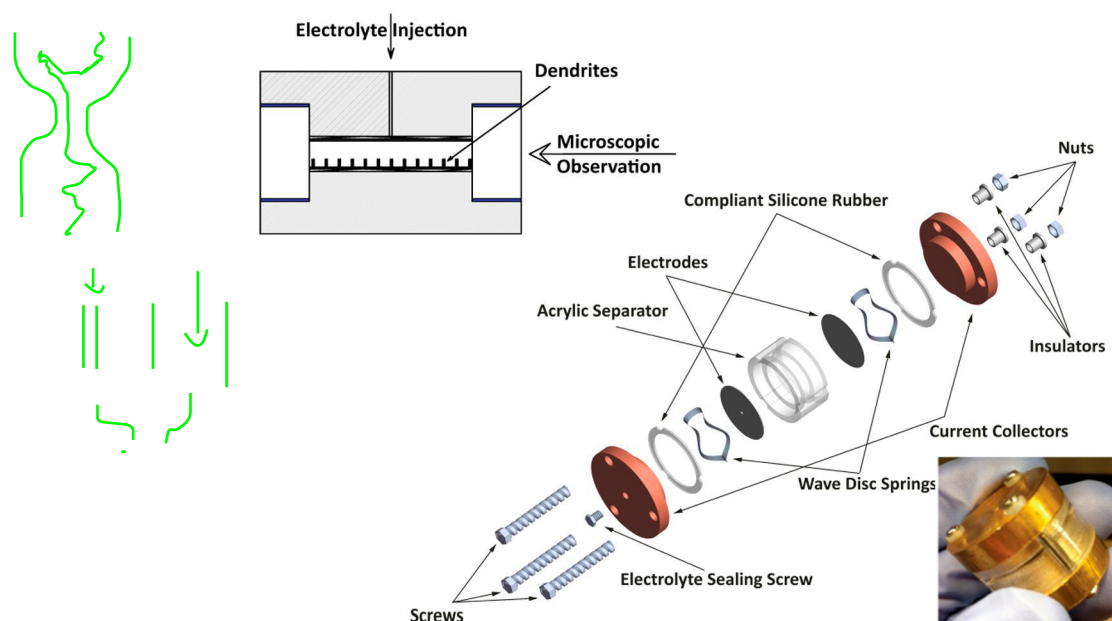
Top to bottom: cross section, exploded view, and physical appearance of the cell.
